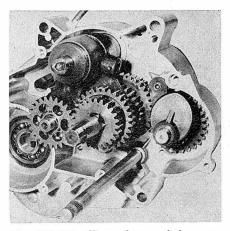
A—View of transmission gears and shafts installed in the right crankcase half.
